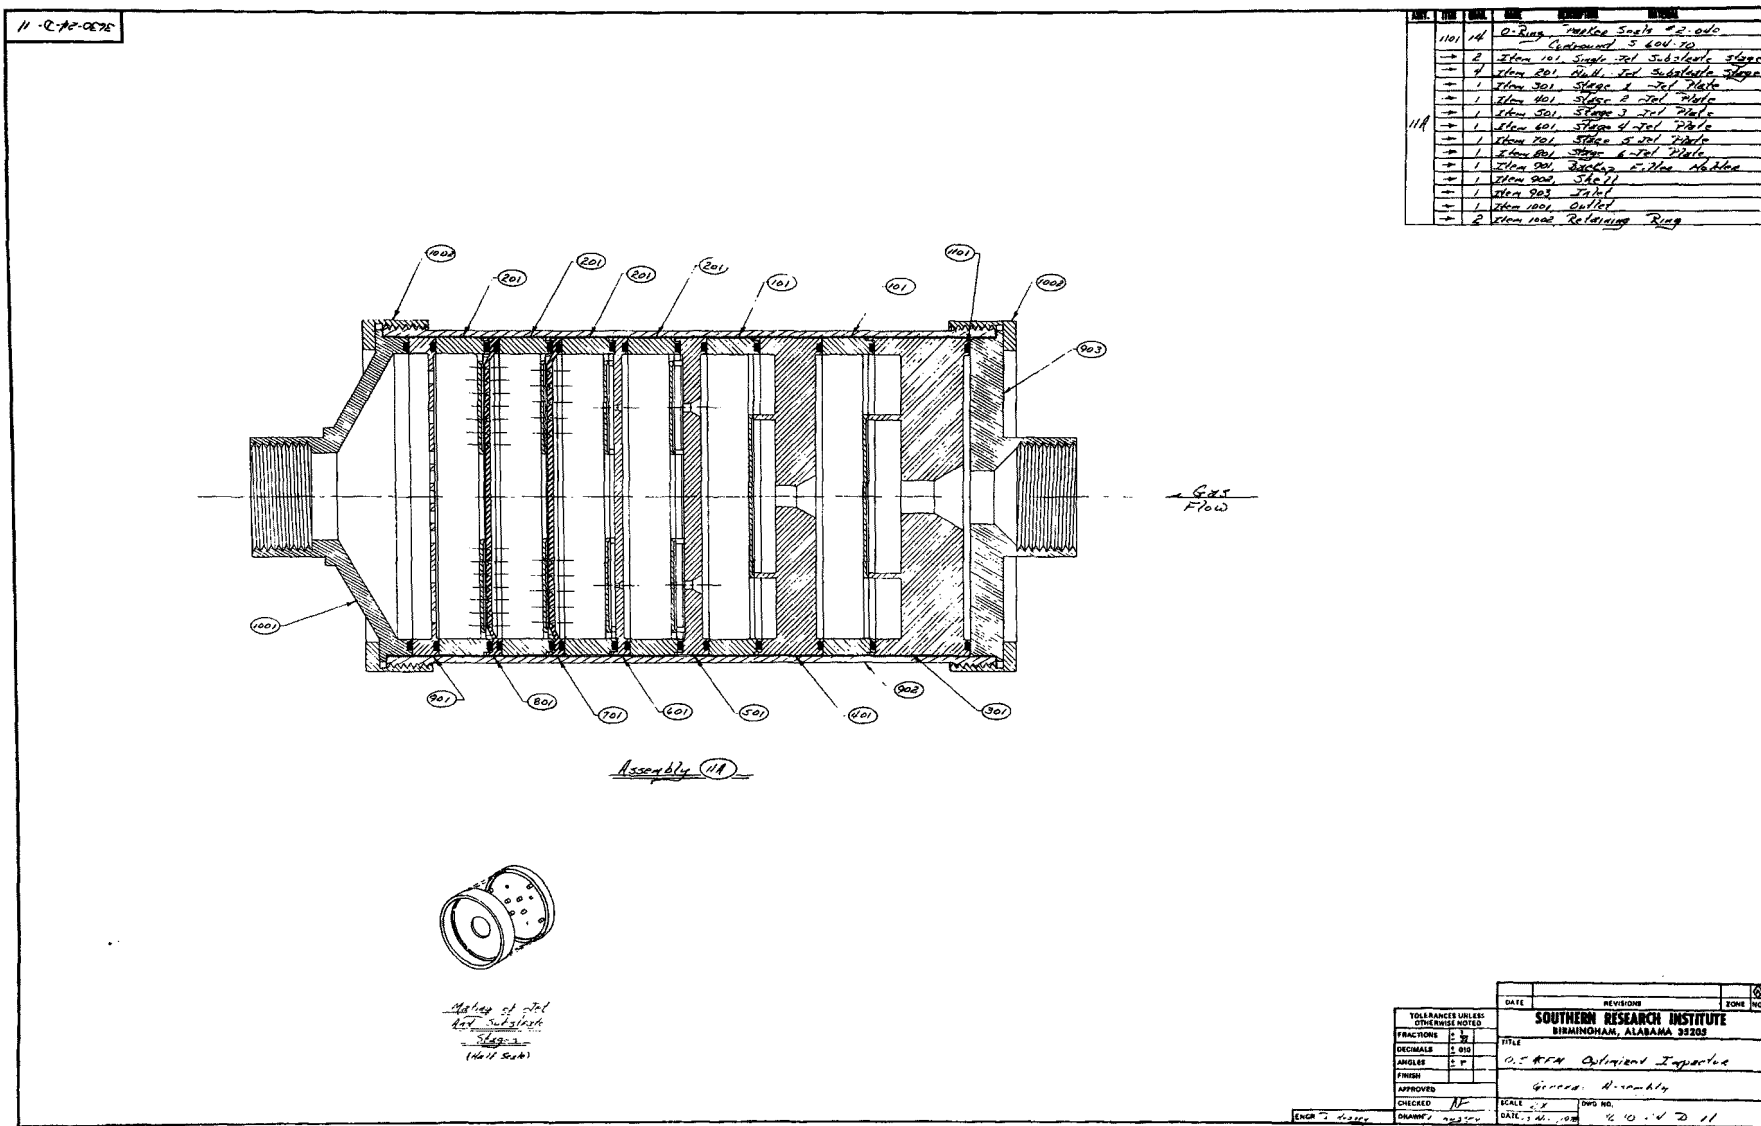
Assembly drawing of 0.5 ACFM optimized cascade impactor.
